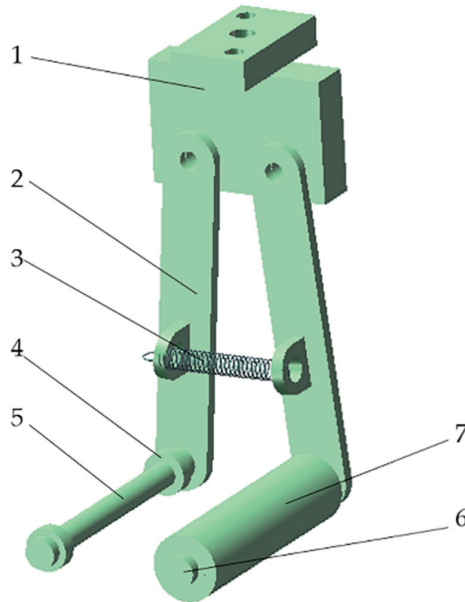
3D model of seedling pressing mechanism. 1. Connecting block. 2. Connecting rod. 3. Spring. 4. Bearing. 5. Shaft. 6. Bearing retaining ring. 7. Seedling pressing rod.
